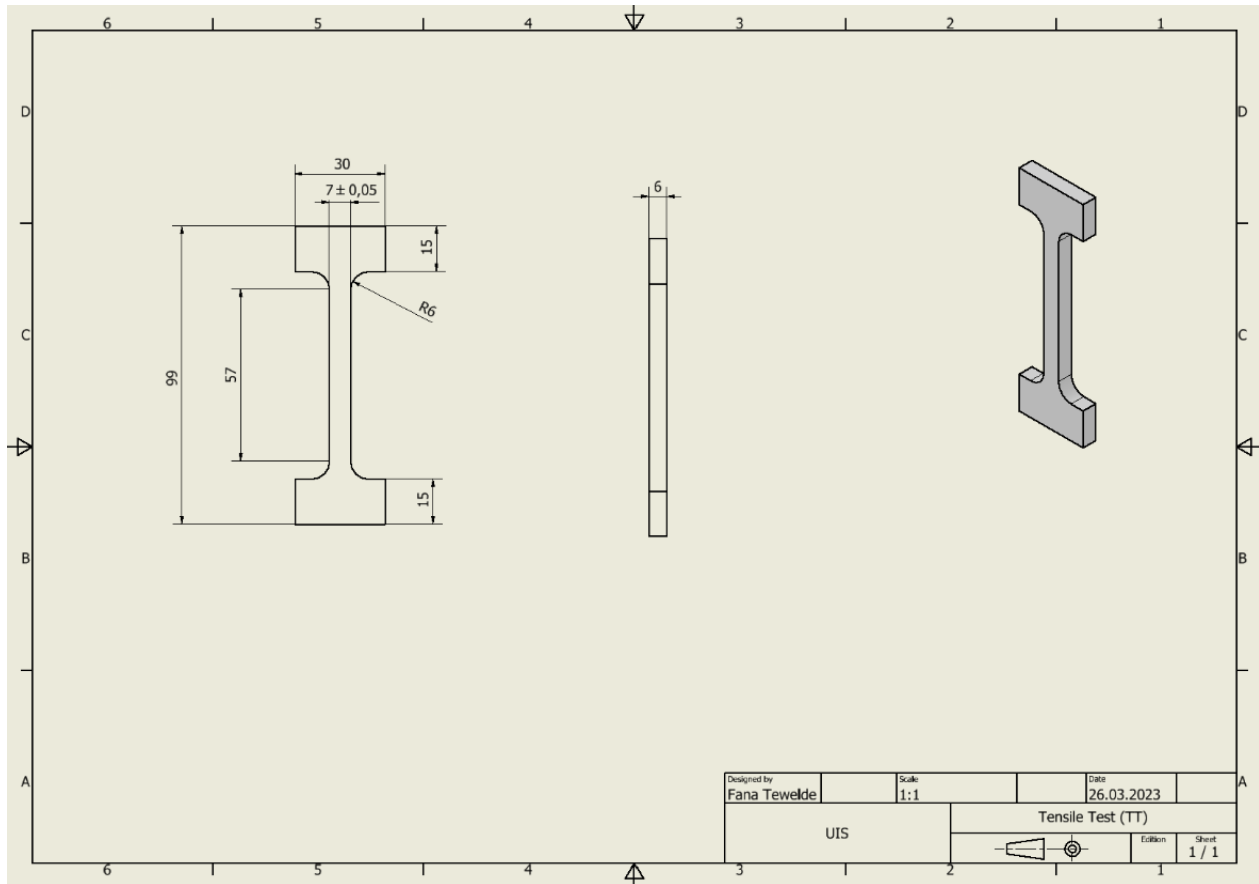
Drawing of tensile test specimen (TT1, TT2 and TT3) and its dimensions in mm. Made in Autodesk inventor.
